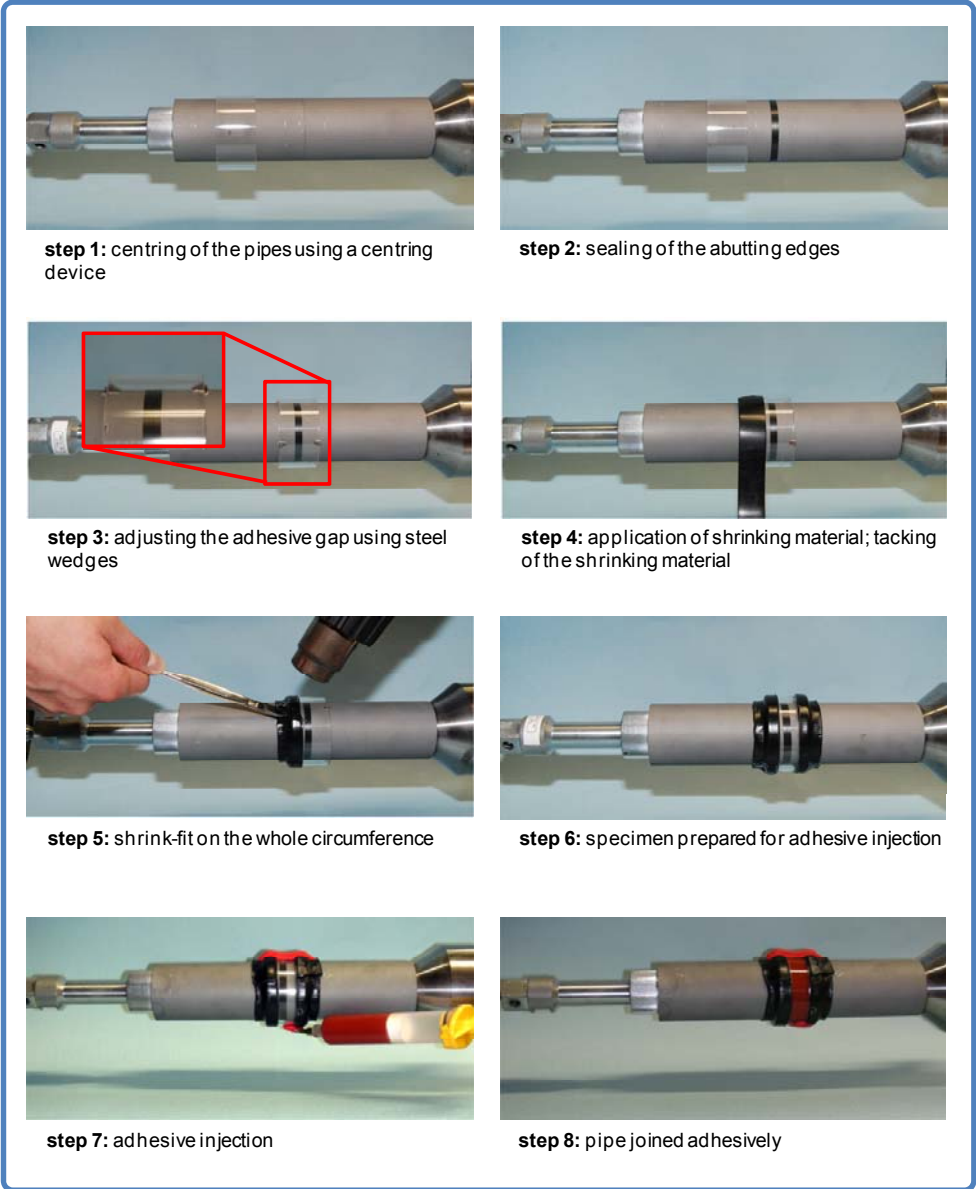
Concept for pipe joining using adhesive bonding (step 4 - 6)
